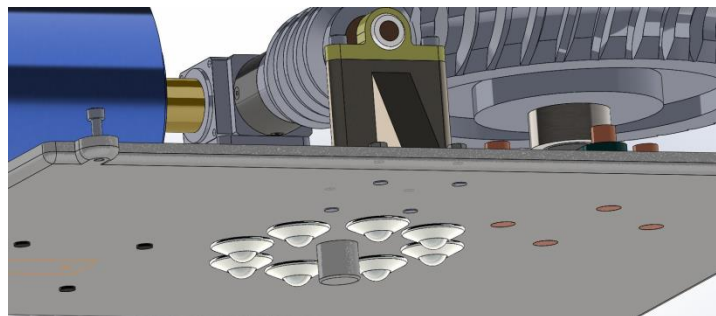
Detailed view of the ball positioner and shaft that supports the bearing support plate
